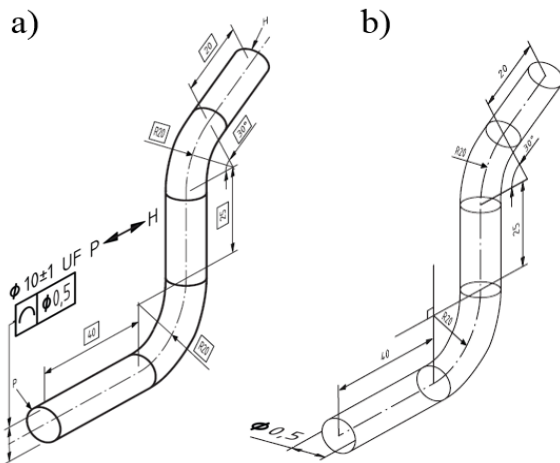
ISO example for derived line specification with line profile tolerance: (a) toleranced component pipe, (b) corresponding tolerance zone [9].
